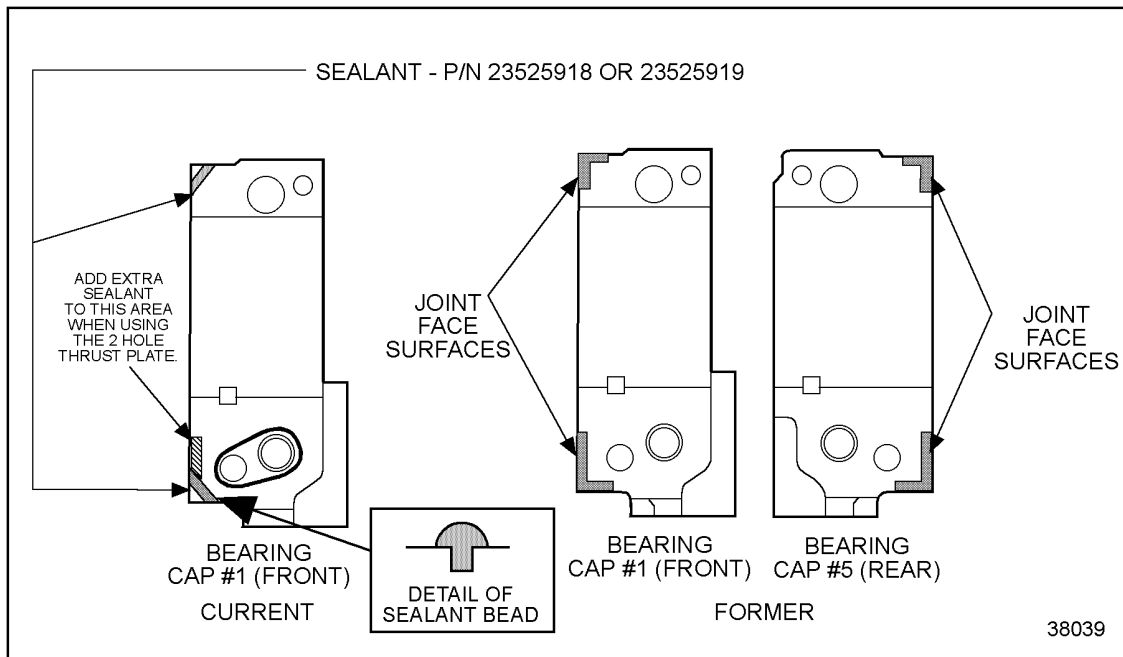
Gasket Eliminator Application (Camshaft Bearing Cap)
